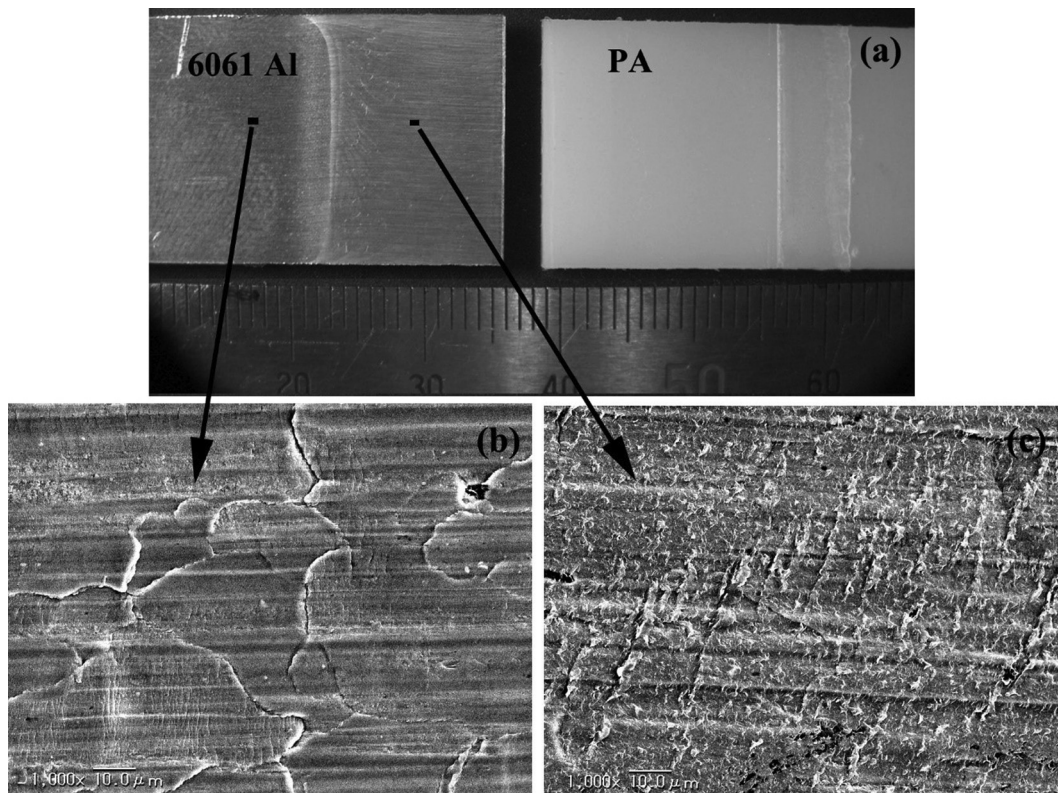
Fracture surface observation of lap joints of PA and 6061 Al produced by friction lap welding at 3000 RPM and 1500 mm/min: (a) optical observation of the fracture surfaces, (b) surface of as-received 6061 Al, and (c) fracture surface of 6061Al with a high volume of residua nylon.
